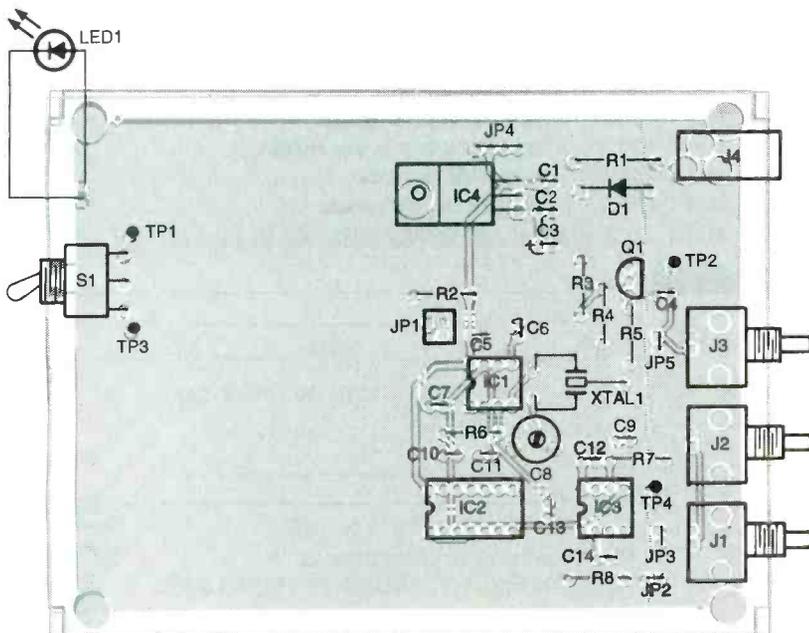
The Colorburst-Calibration Reference is easily built on a printed-circuit board. Note that all parts are PC mounted; no additional wiring is necessary unless you need to use short lengths of wire-wrap wire as jumpers between both sides of the board.
